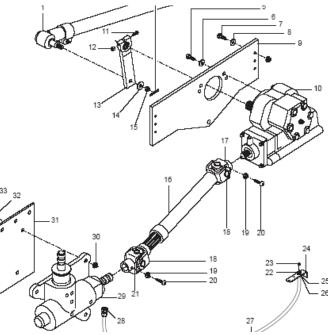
Miterbox/Steering Shaft/Steering Gear Box
